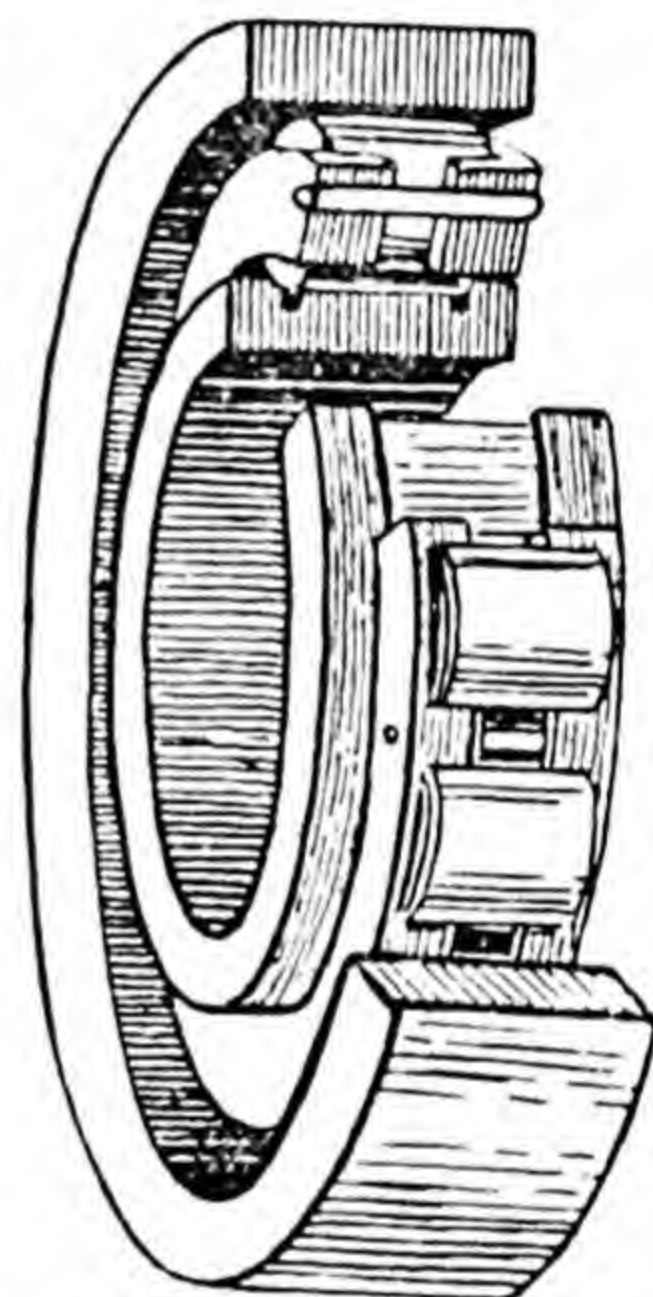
A roller bearing with the front cut away to show the rollers. This makes the friction very small indeed.
